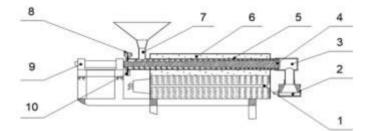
Equipment used in industrial production 1-Electrical resistor, 2-Extrusion mold, 3-Cylinder's cover, 4-Rice powder,5-Screw extruder, 6-Water, 7-Liquid powder feeder, 8-Seal housing, 9-Bearing, 10-Seal
